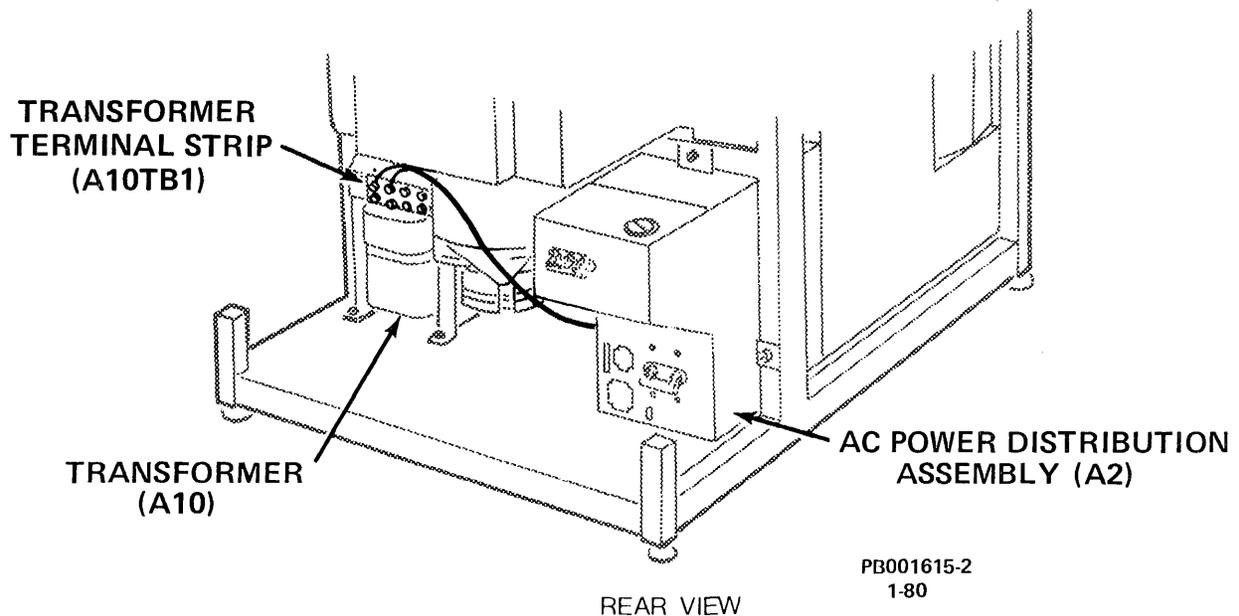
AC Power Distribution Assembly and Transformer Assembly
